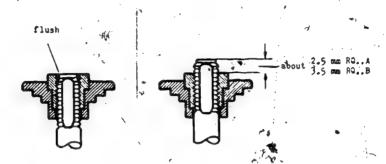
Tolerances for projecting of threaded bolts
